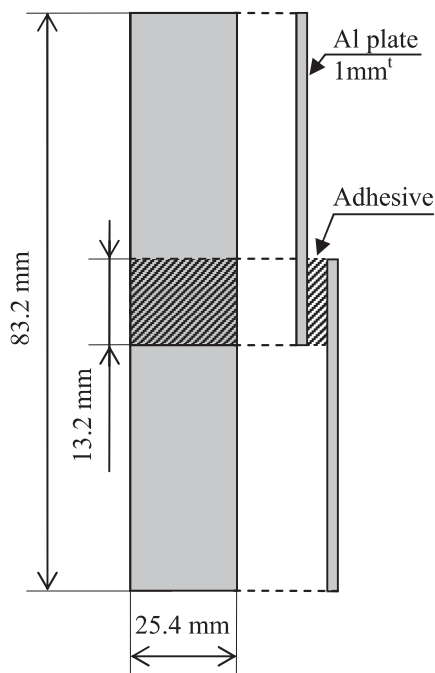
Dimensions of adhesive specimen for SM/MPAC&amp;SEED
